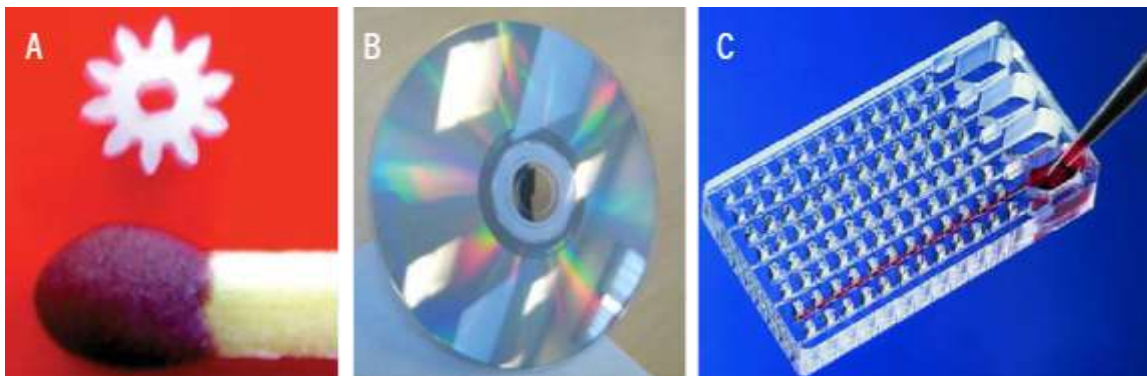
Example of a micro-molded part: A - micro-gear; B - macro-part with a micro-structured region (DVD disc) [113] C - cell chip LILLIPUT made by injection molding [140].
